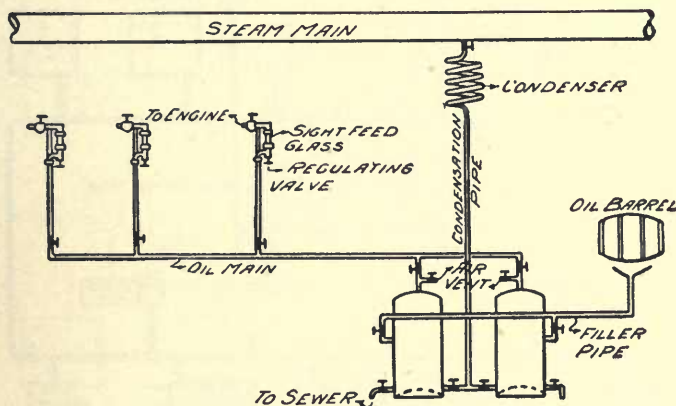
System; Feeding Cylinder Oil from Tank to Engine.
